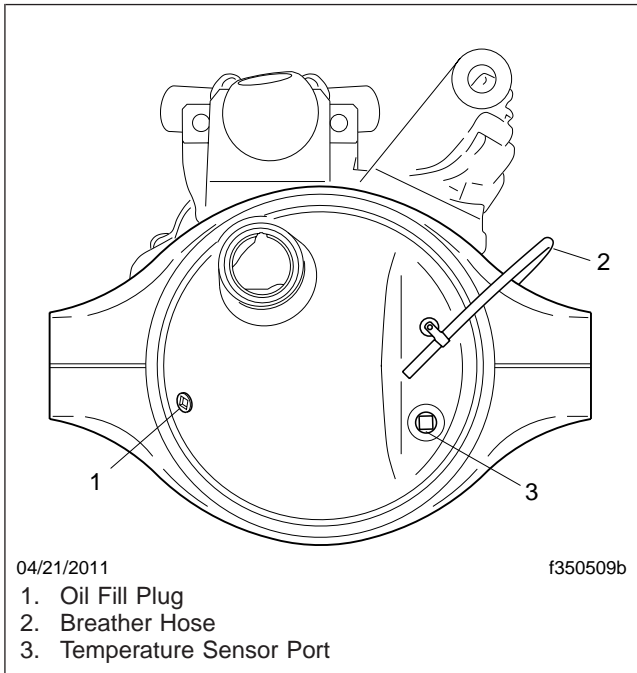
, Fill Hole Plug Location, Freightliner Tandem Axle (forward axle shown)
